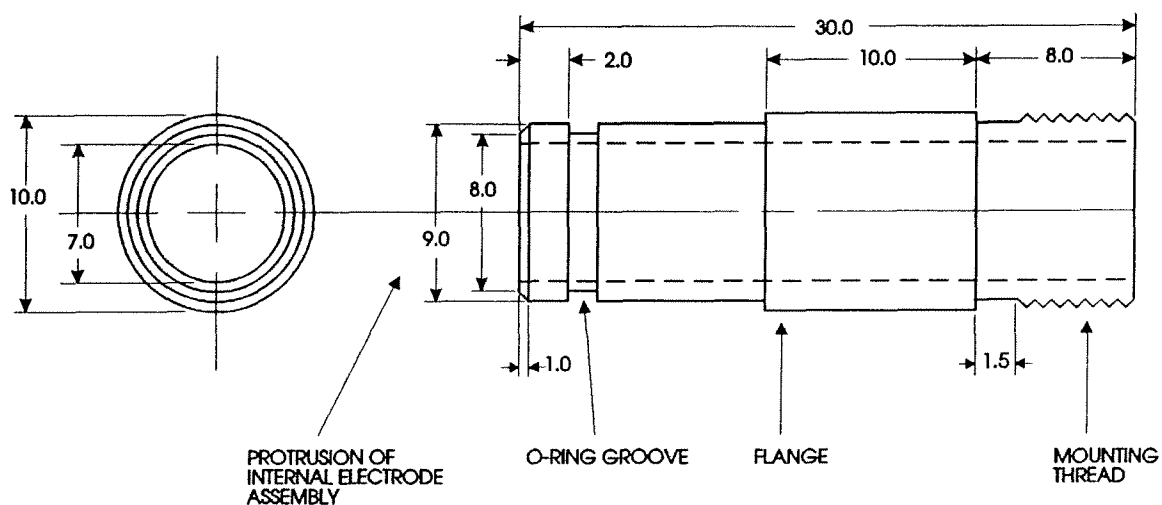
Stainless steel adapter for mounting the internal electrode unit. The threaded end mounts onto the electrode shaft of the probe body; the three-electrode unit protrudes from the opposite end. The electrode lead wires were routed through the inside of the adapter and the electrode shaft to the opening at the top of the probe body. The flange on the adapter prevented over-insertion of the electrode unit by stopping against a steel shoulder inside the probe body. Drawing not to scale.
